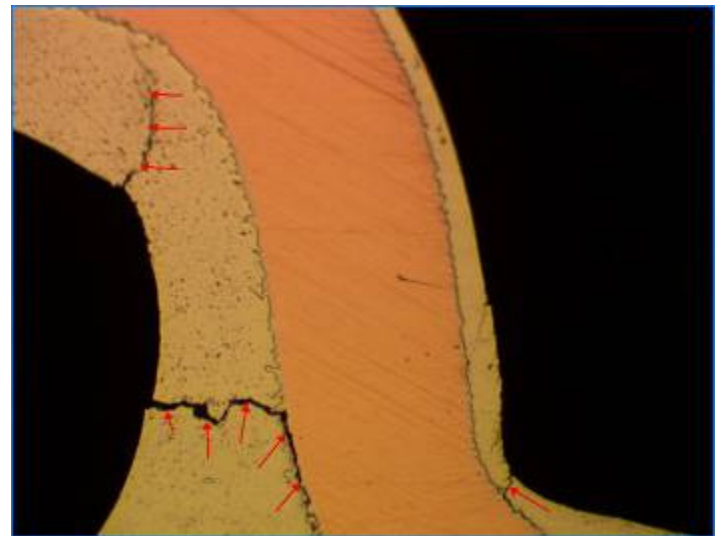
cross section, SN63, U41, right lead solder crack, 200x
